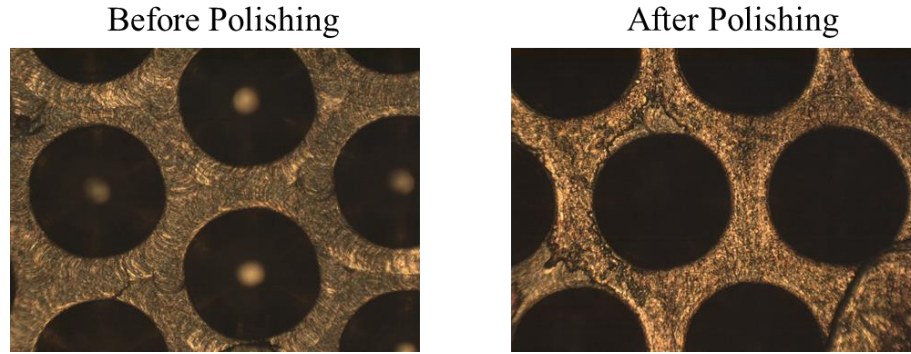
The machine marks left by the cutting tools disappeared after the polishing process and left a smoother surface.
